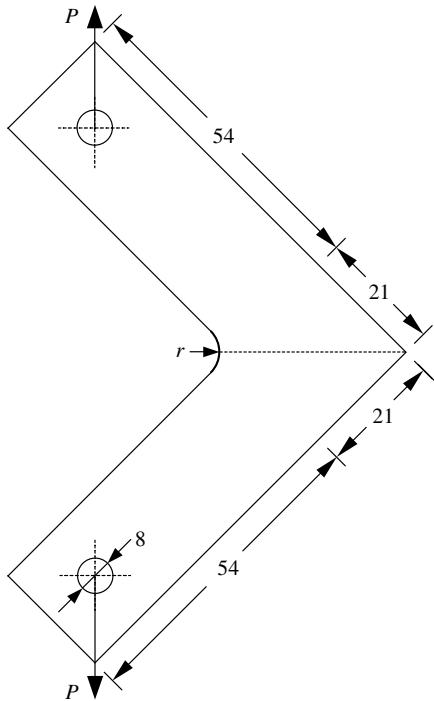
Dimensions (mm) and loading of the L-shape specimen (15 mm thick).
